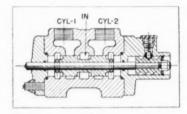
Cross-sectional view of valve shown in Fig. 1
